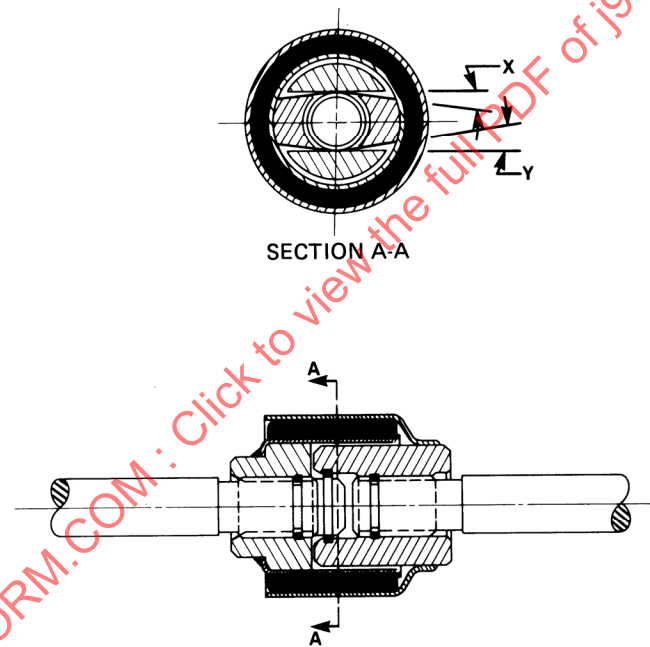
SPLIT AXLE SHAFT MOUNTED ISOLATION DAMPER
